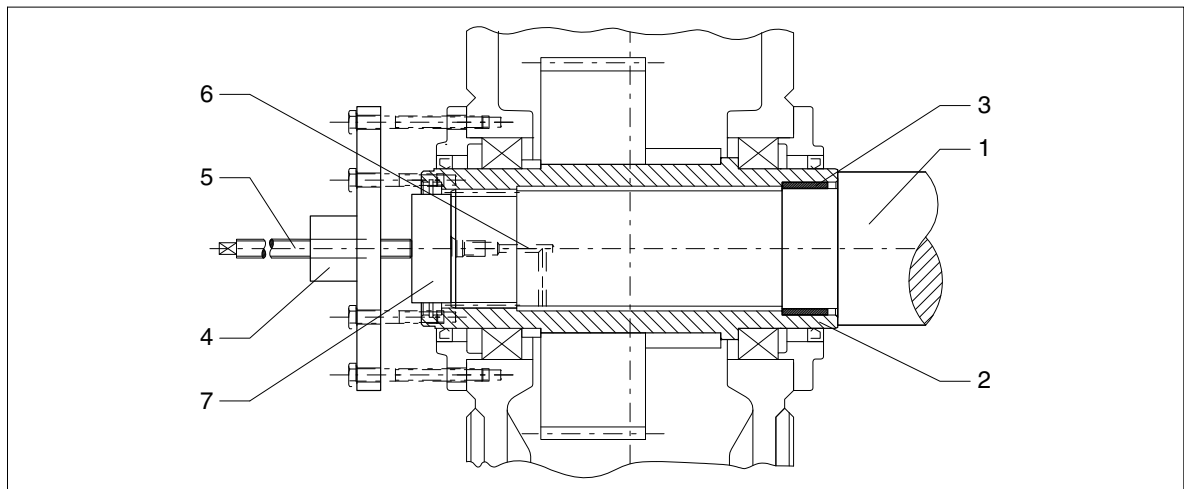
Hollow shaft with internal spline, demounting with hydraulic lifting unit
